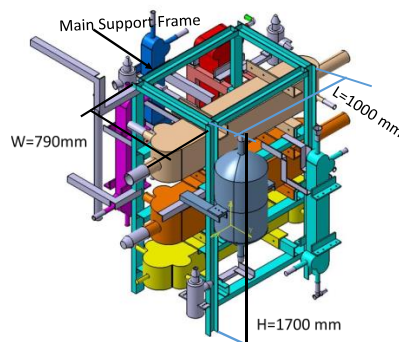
3D model of Assembly of main cold components of cold box of cooling power 200W at 4.5 K
